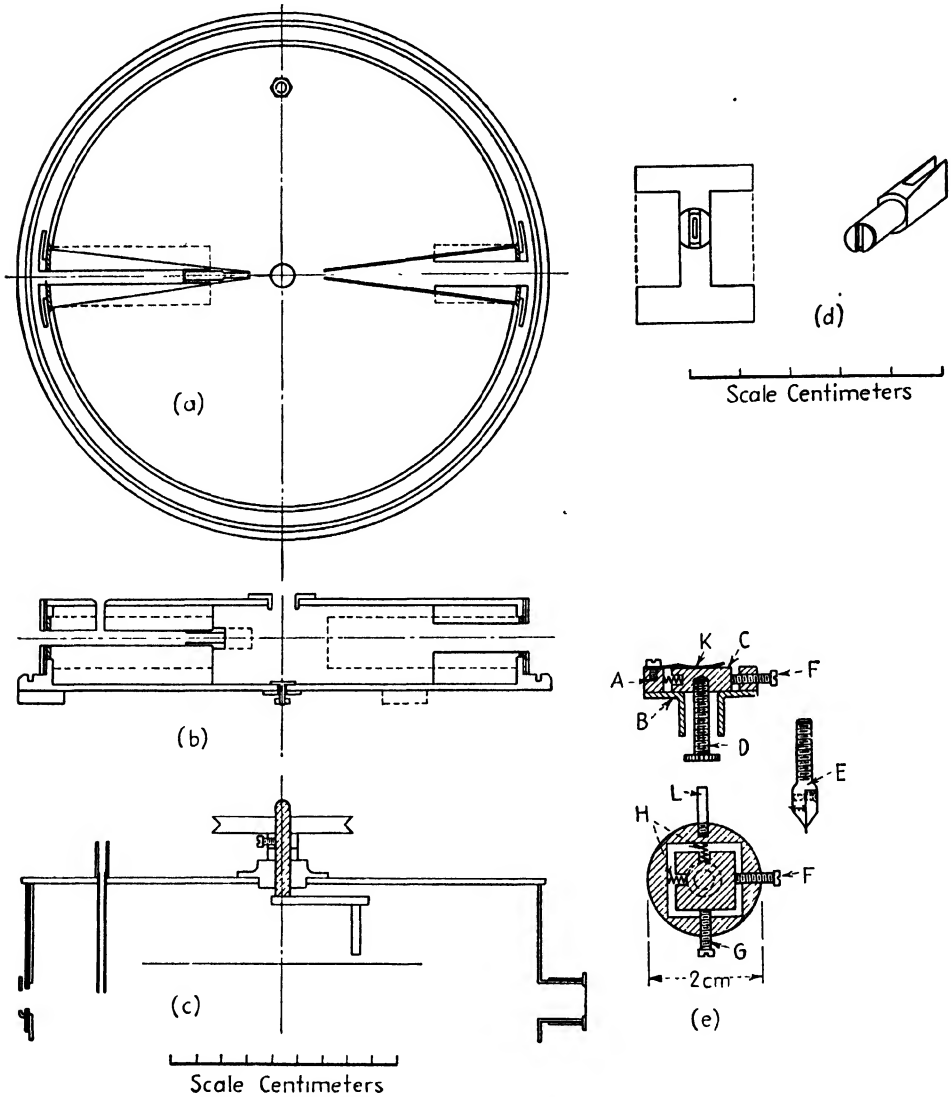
Powder camera designed by Bradley and collaborators. (a) Horizontal section of camera, (b) vertical section, (c) lighttight cover with pulley and arm to rotate specimen mount, (d) slit system, (e) specimen mount with screws F and G for centering specimen.
